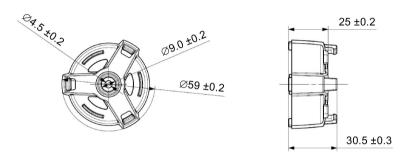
Dimension drawing of spacer 6GT2690-0AL00
